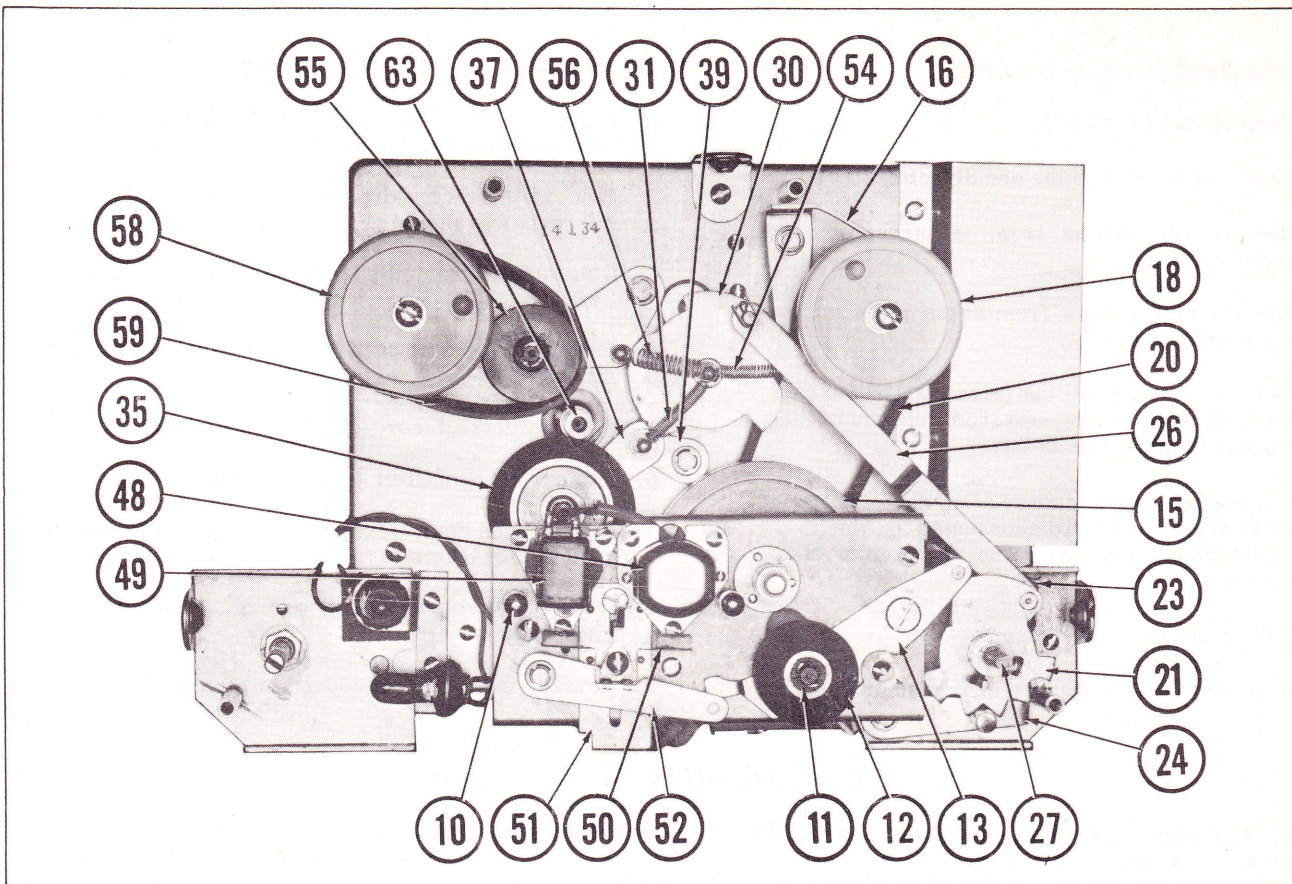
TOP VIEW OF MECHANISM WITH DRESS PLATE REMOVED
